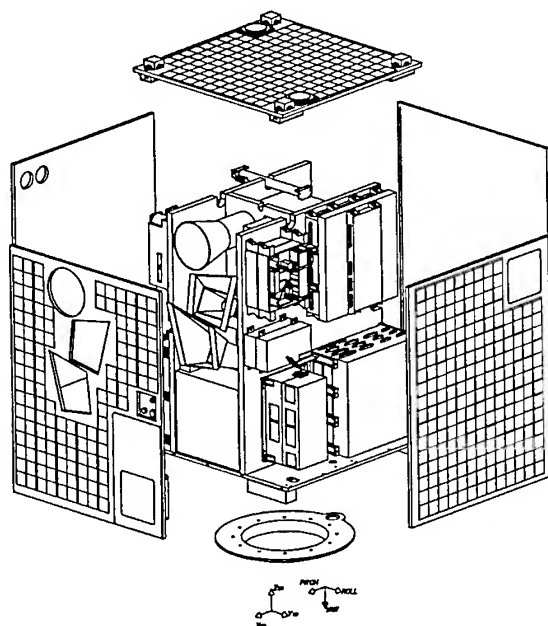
Exploded view of PROBA demonstrating the internal H-assembly with the units and the outer panels with the body mounted solar cells.
